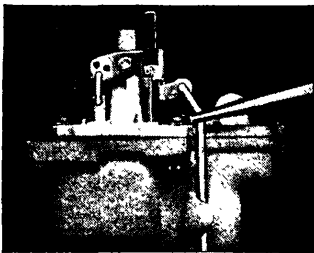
Throttle connector rod should just fit in hole in pump arm
